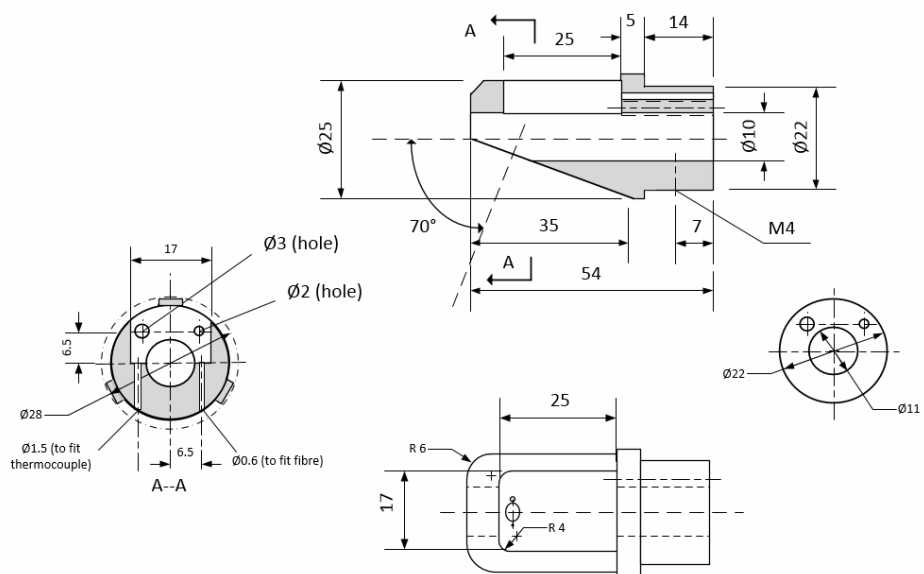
shows the mechanical drawing of the completed integrated probe including the probe head, base and protective tube, capable of housing the optical probe fibre, and thermocouple. The design of the integrated probe assembly allows the three sensing parts [i.e., the rigid optical probe (for flame imaging), optical fibre (for spectrometer); and thermocouple (for probe temperature monitoring)] being secured within the probe head and enveloped in a single stainless steel tube, ensuring that the viewing angle of the optical fibre is lined up with the flames inside the boiler.
